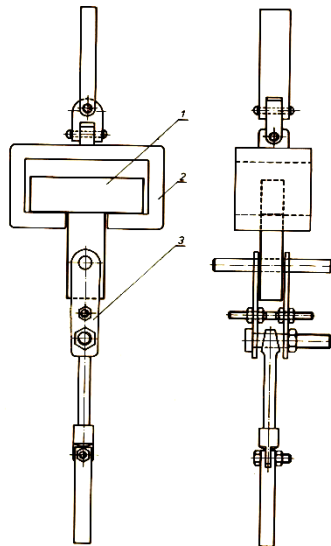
Scheme of testing the samples under tensile strength: 1 – testing sample; 2 – device for holding the upper part of the sample; 3 – device for holding the bottom part of the sample
